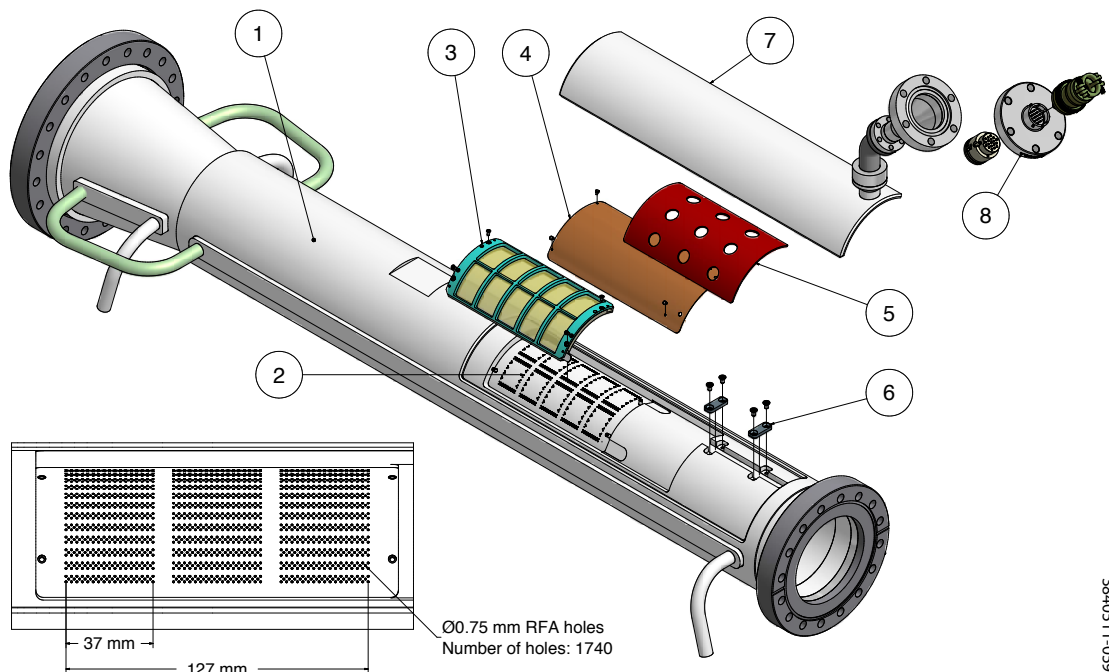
Exploded view of the structure of the RFA within a CESR quadrupole beam pipe. The major components of the RFA beam pipe include: (1) Aluminum beam pipe with cooling channels; (2) RFA housing and wiring channels; (3) Retarding grids, consisting of high-transparency gold-coated meshes nested in PEEK frames; (4) RFA collector flexible circuit; (5) Stainless steel backing plate; (6) Wire clamps; (7) RFA vacuum cover with connection port; (8) 19-pin electric feedthrough for RFA connector
